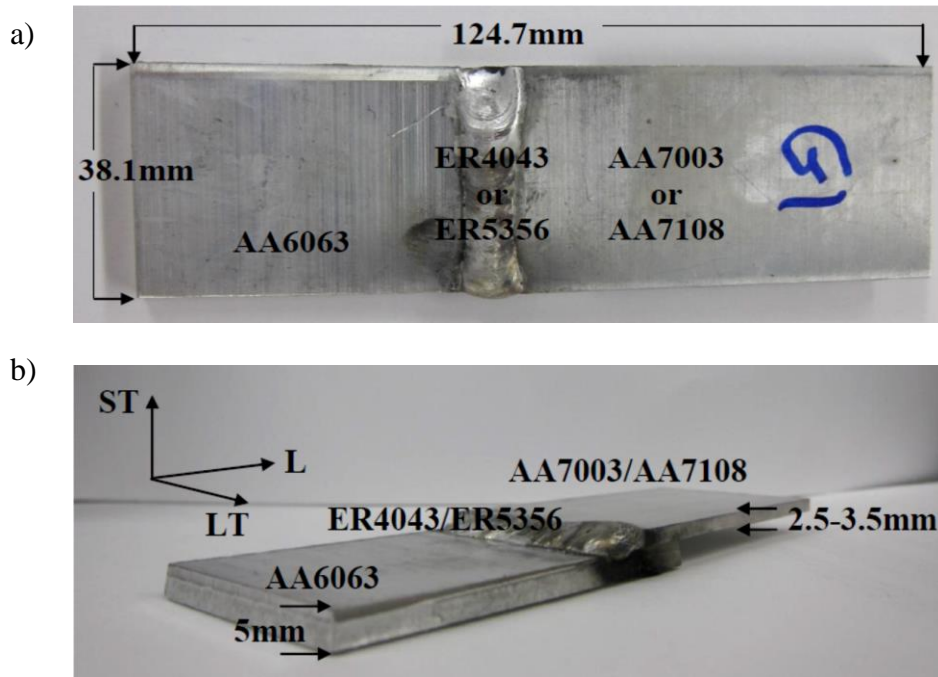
Welded AA7xxx lap-joint configuration with all major dimension as seen from (a) the top view and (b) side view. Figure 10 b indicates three orthogonal directions used to identify cross-sectional planes.
